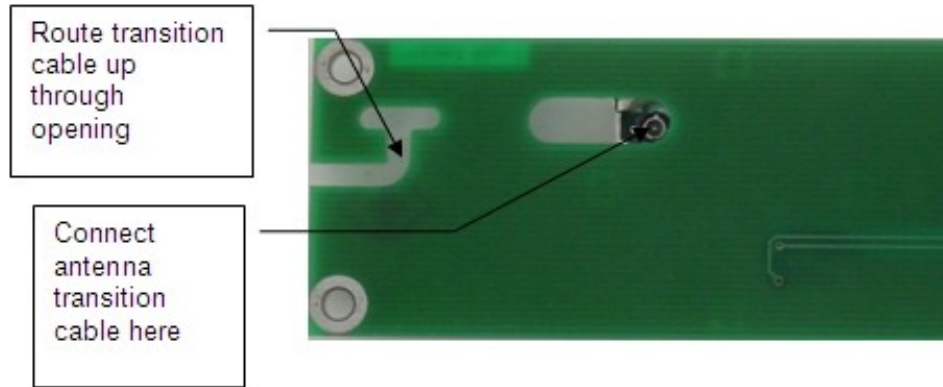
Lassen iQ™ Module Solder Side (enlarged view; see below)
